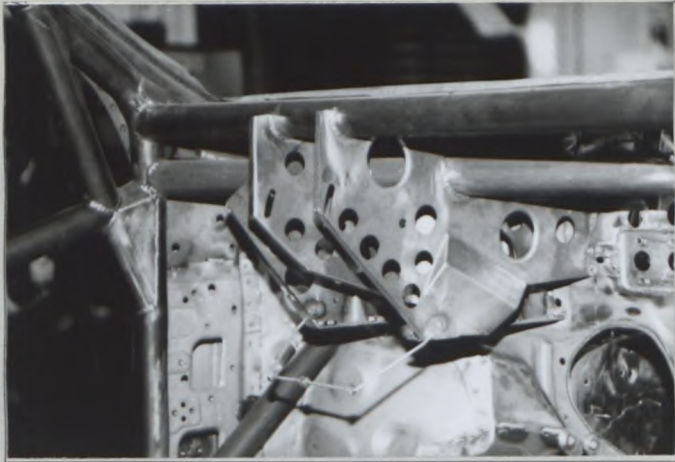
(FRONT HOOP TO FLOOR)
